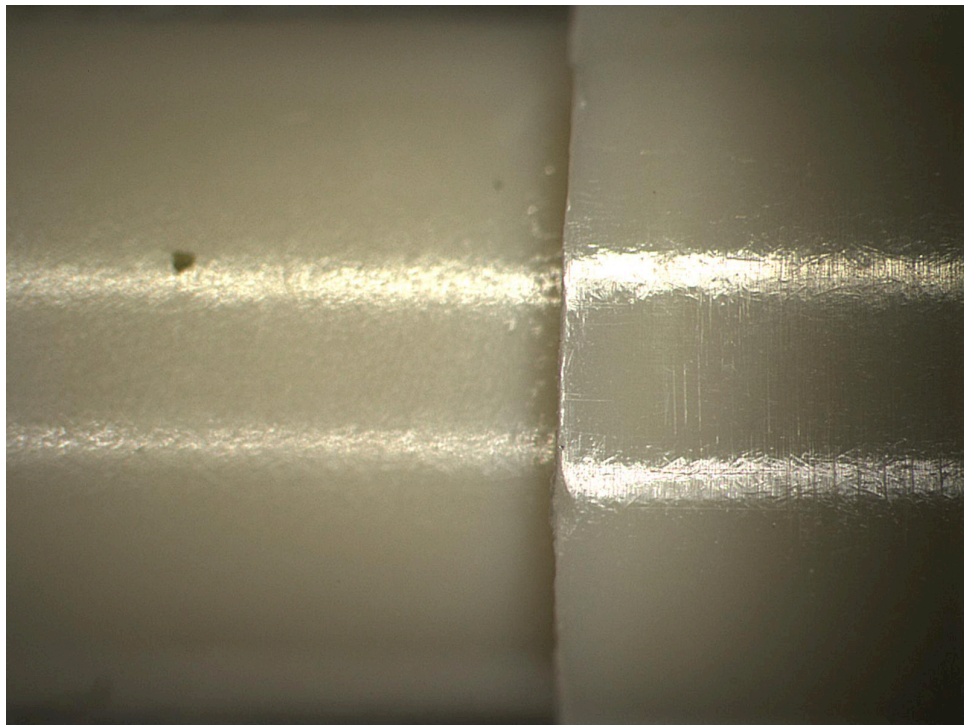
Sample 1403A11-001D Post Un-welded
